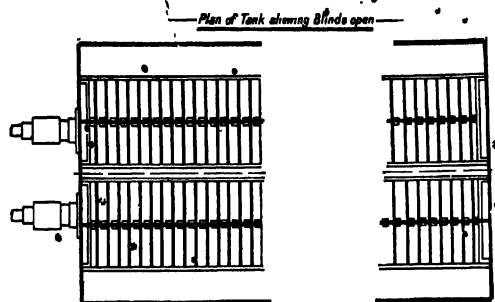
The Wilkinson, Heywood and Clark Paint Dipping Tank—Plan.
